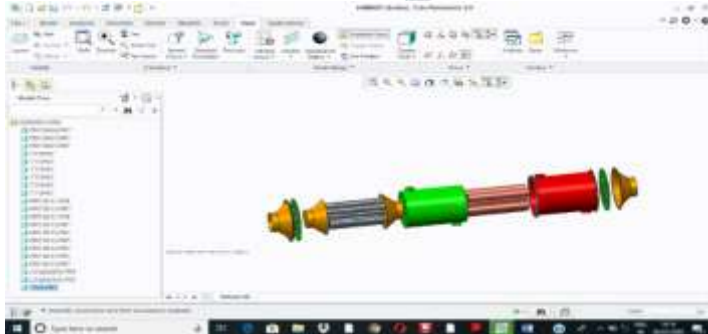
EGR Cooler Assembly with Fluid Model
